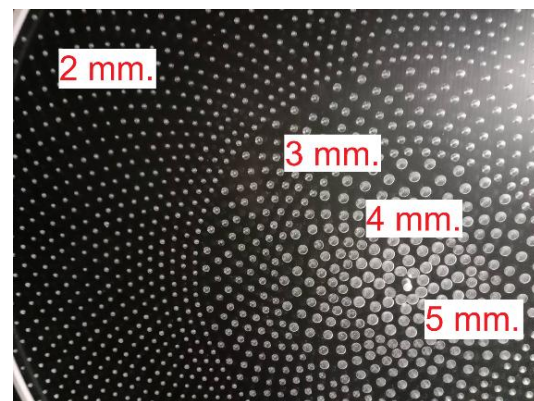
2, 3, 4 and 5 mm \varnothing drilled holes.
